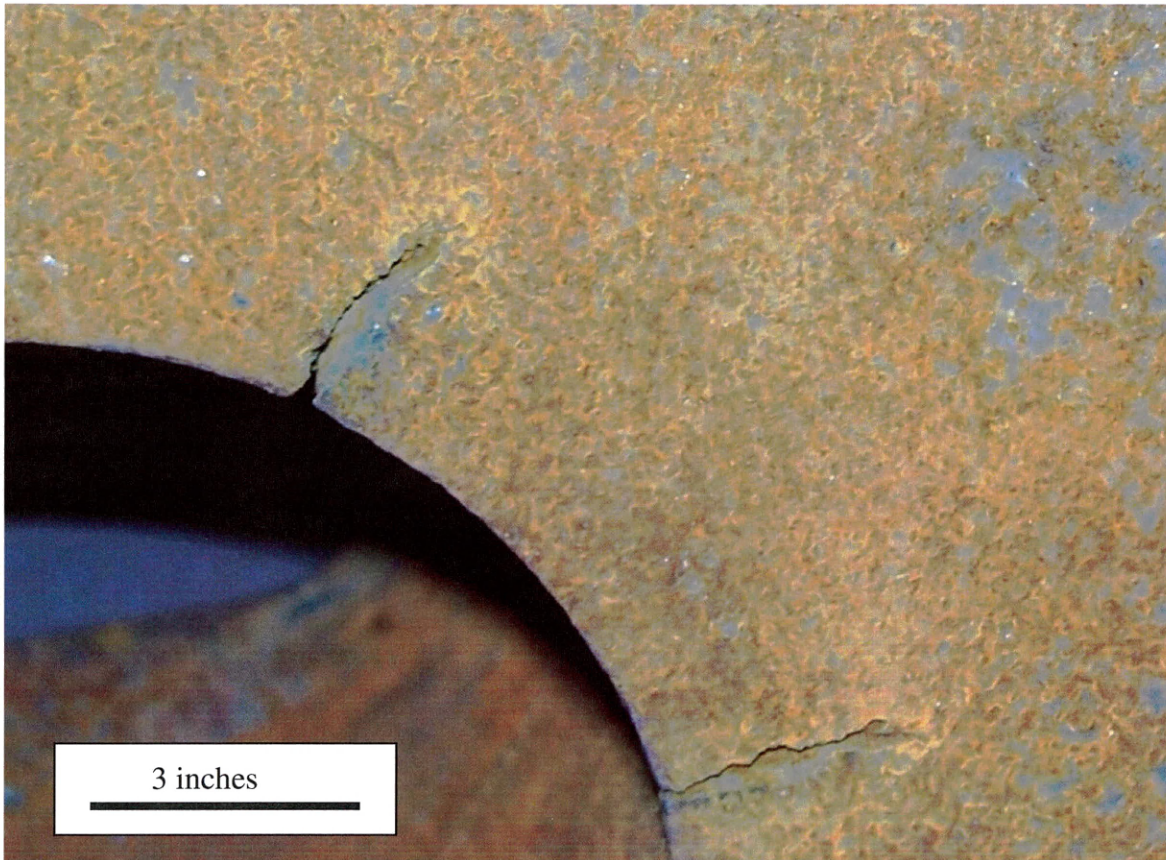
Cracked boiler valve specimen showing major cracks radiating from the interior surface of the valve [2]
